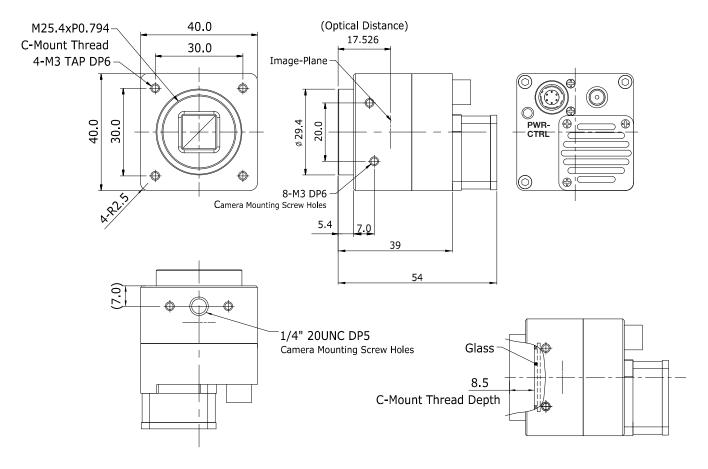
VC-4MX-M144F00-FAN Mechanical Dimension
